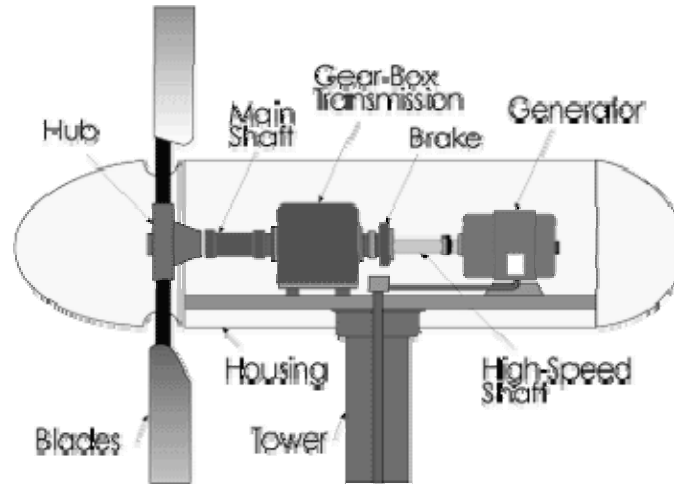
Cross Section View of Typical Turbine Assembly [14]
